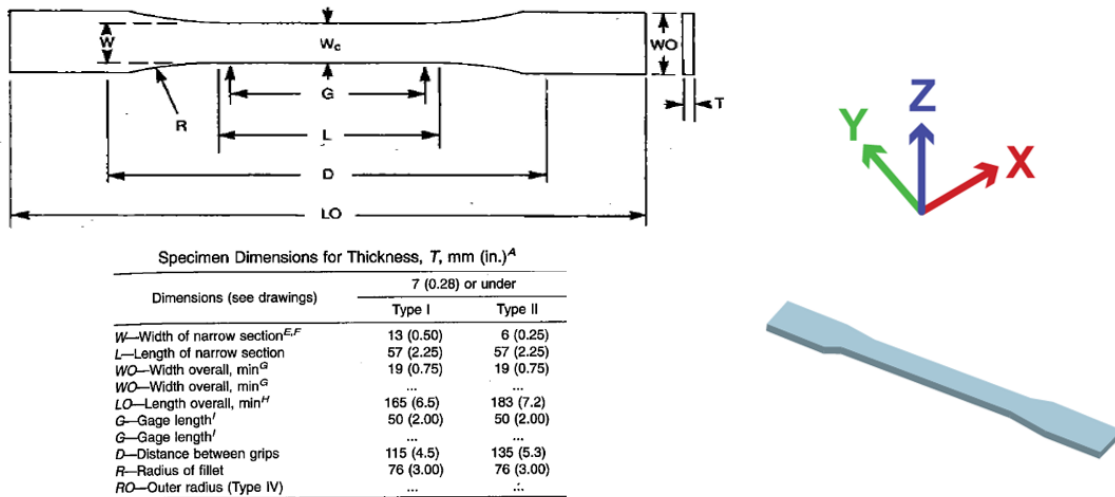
Specimen construction as per ASTM D638 for Tensile Test [17]
